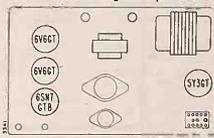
Top View of Amplifier Chassis. Tube locations shown.
